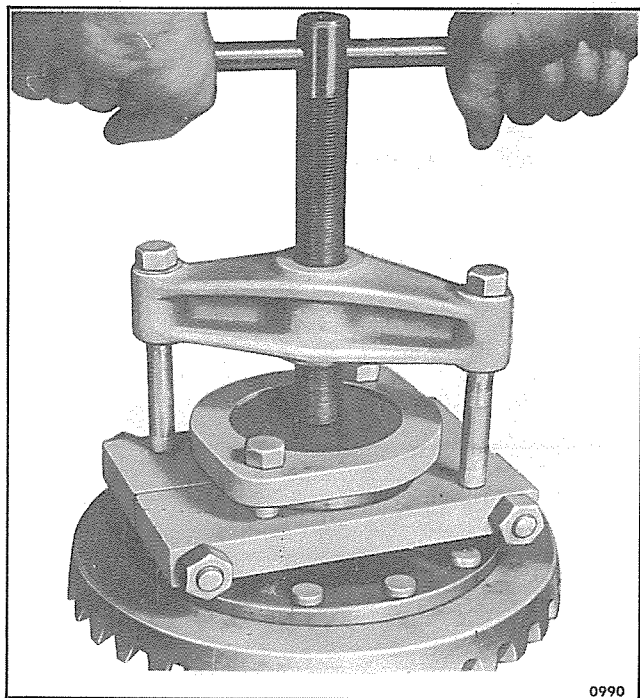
Removal of Differential Side Bearings (Tool No. CS-1047)
